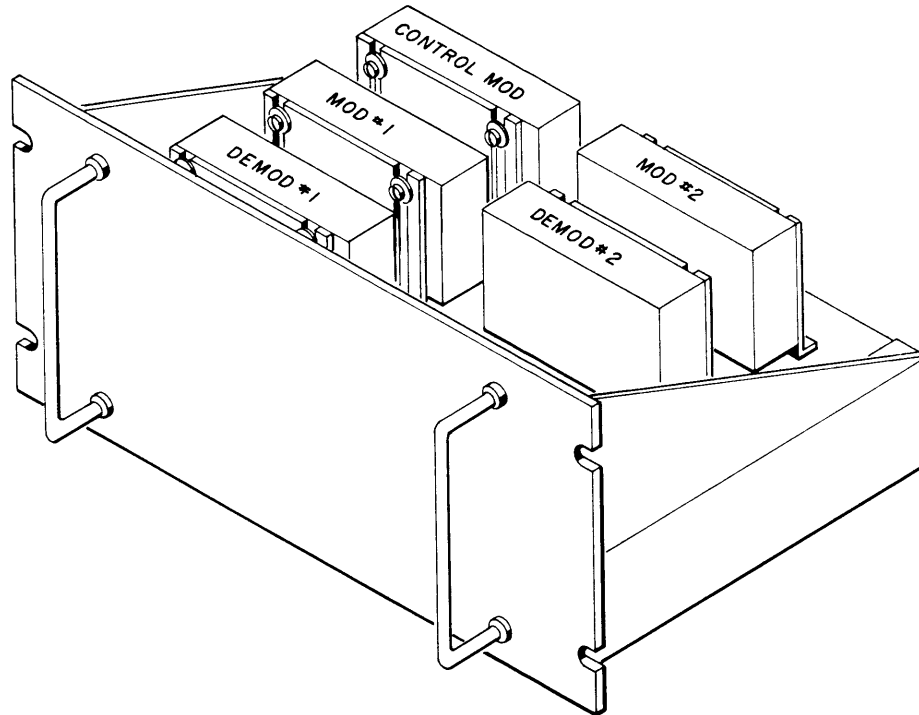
KW-26 Tone Converter Drawer, Left Hand, Isometric View
